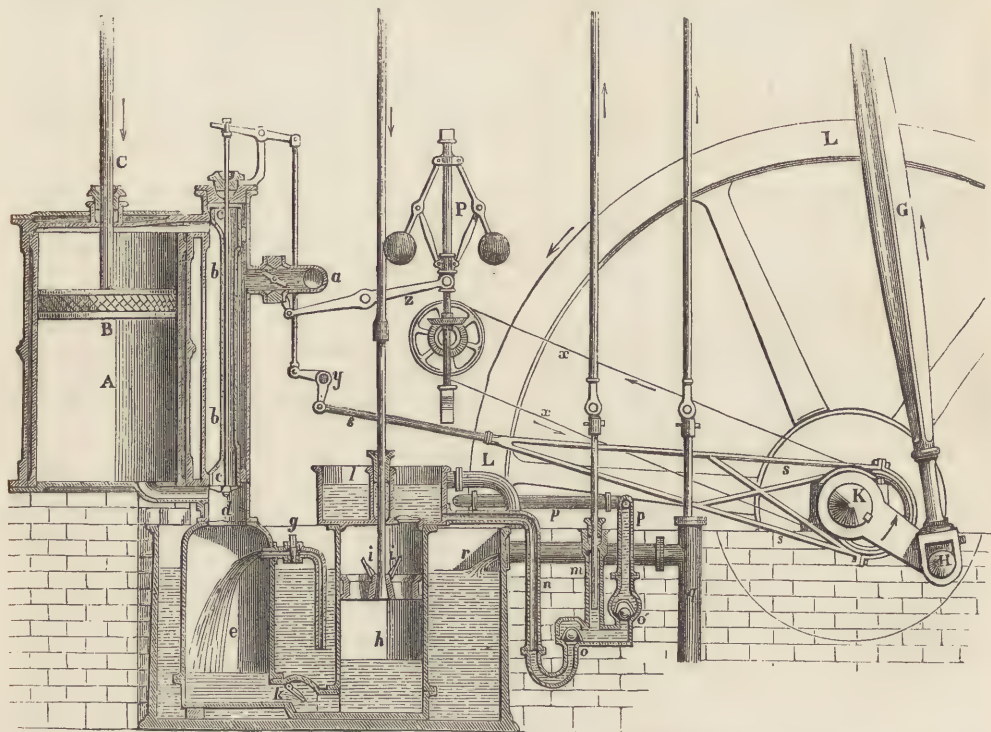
WORKING PARTS OF WATT'S DOUBLE ACTING ENGINE.
